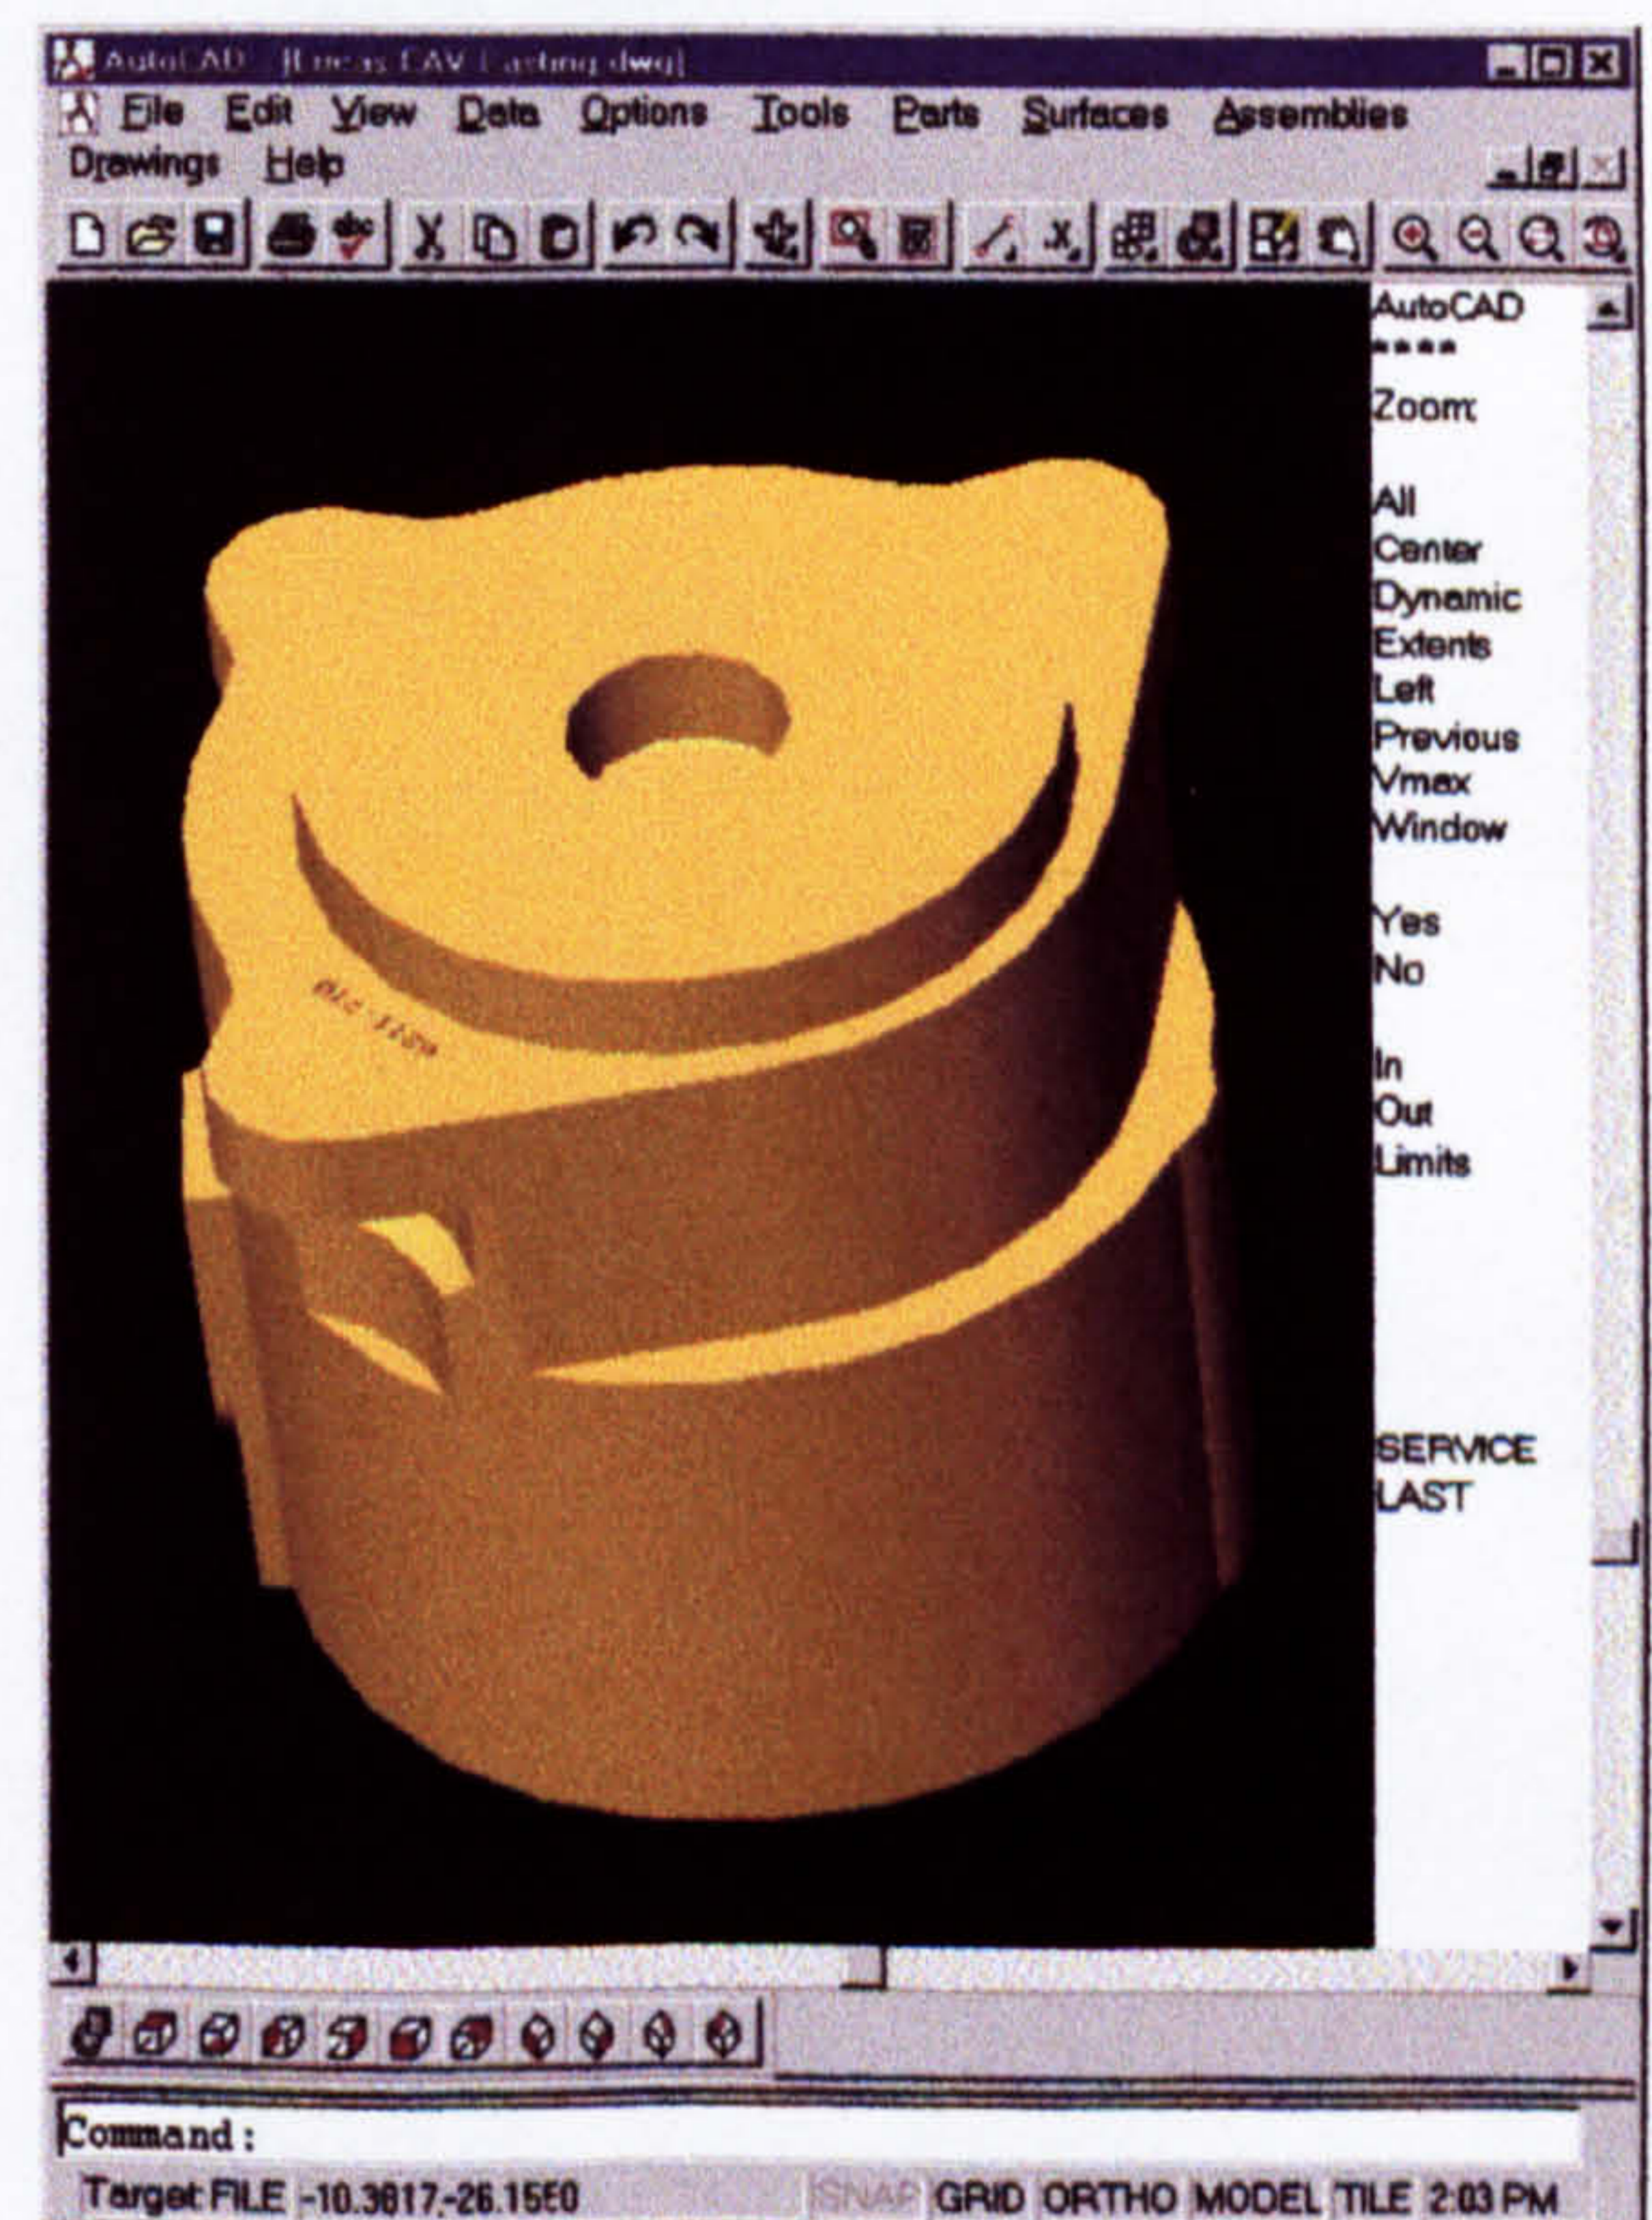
Drive-End-Shield No. V6211-710 - CAD Model & Parameters
